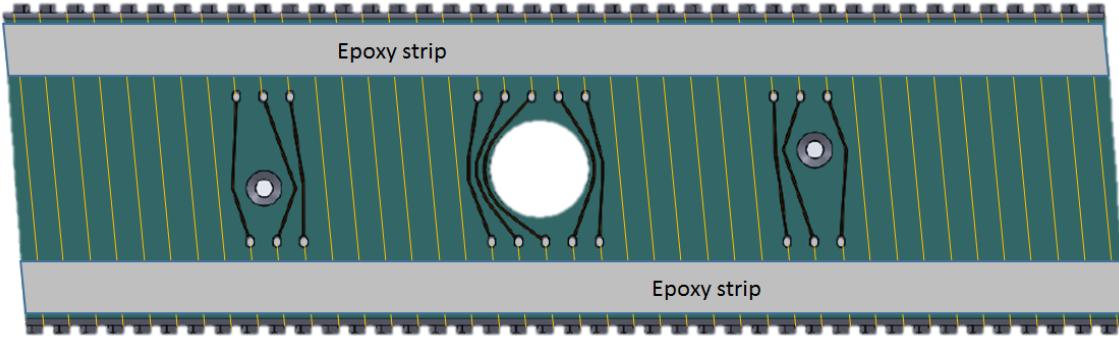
Design of a wire wrapping board for the U wires on a long edge of an APA. The light, angled lines represent the wires wrapped over the board surface. Some wires near the mounting holes must be soldered to the copper traces and then cut. An epoxy strip attaches the wires to the board so the solder is only critical for the electrical connection.
